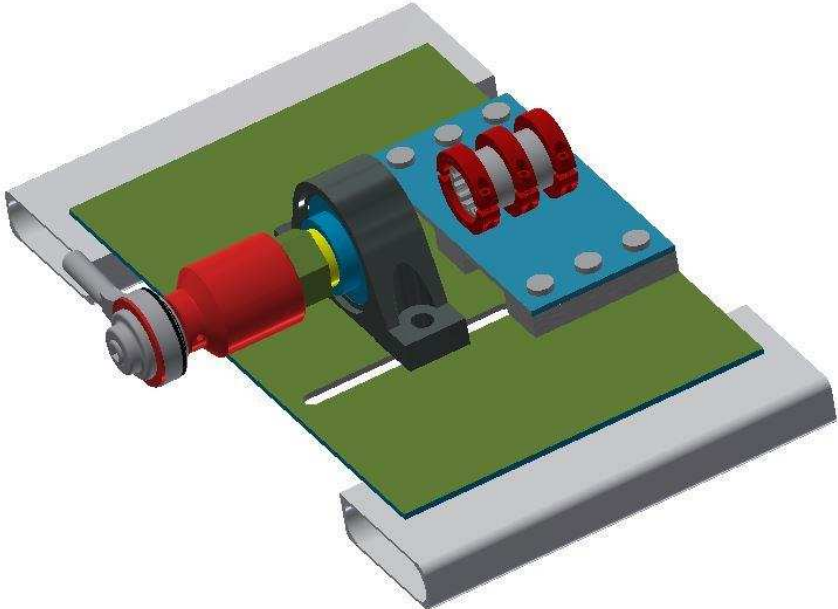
Full test fixture assembly CAD (not pictured are bolts mating hex stock to applicator coupling)
